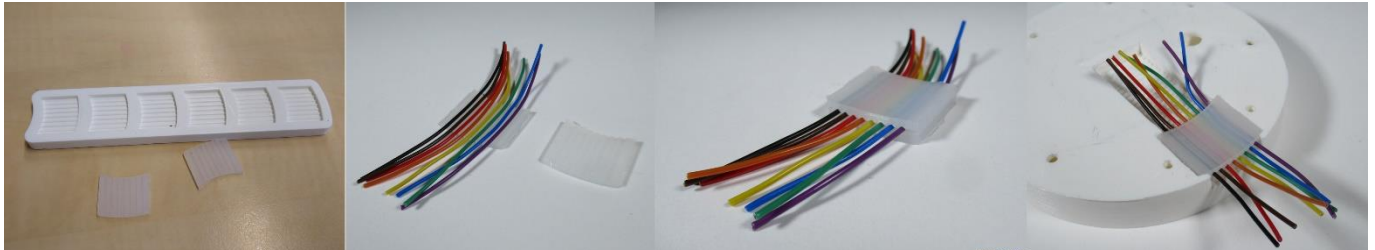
Mold of wire clamps (left) and wire clamps as they should be assembled in the base plate
